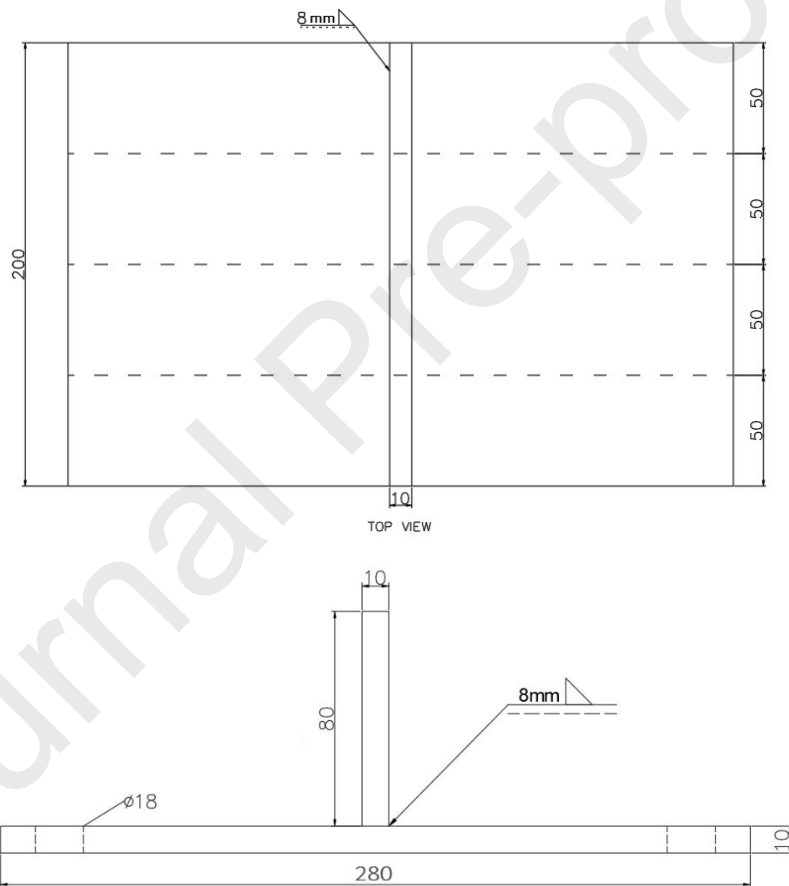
Geometry of the specimens used in the experimental tests (dimensions in mm).
